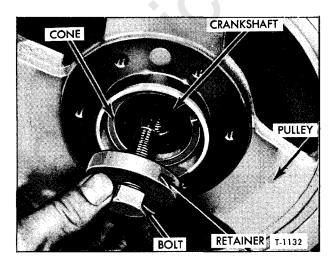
Crankshaft Damper Retaining Parts (Typical)
